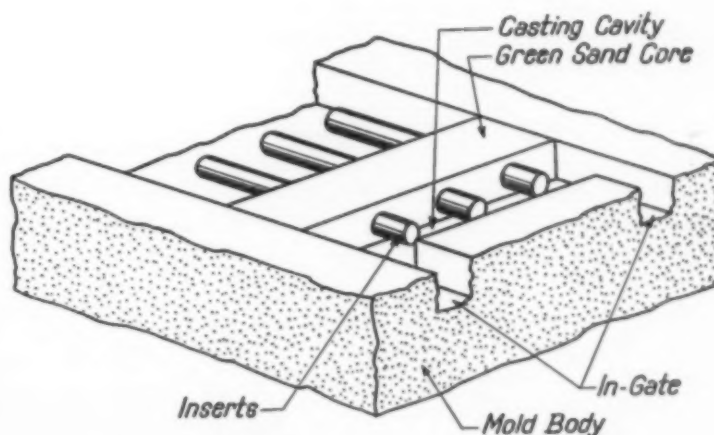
Diagrammatic Sketch of Proper Method of Molding for a Casting With Metal Inserts
